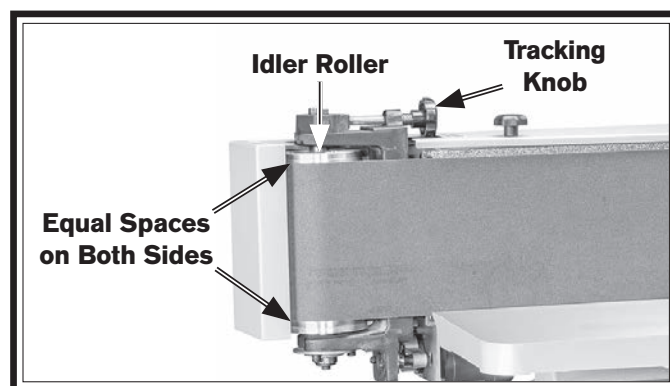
Location of tracking knob and example of sanding belt centered on idler roller.
